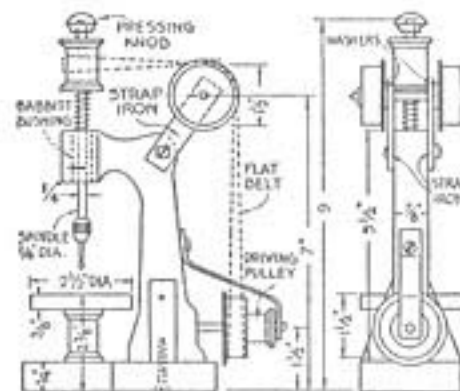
The miniature drill press. The chuck, taken from a hand drill of the spiral type, is pinned and soldered to the spindle.
